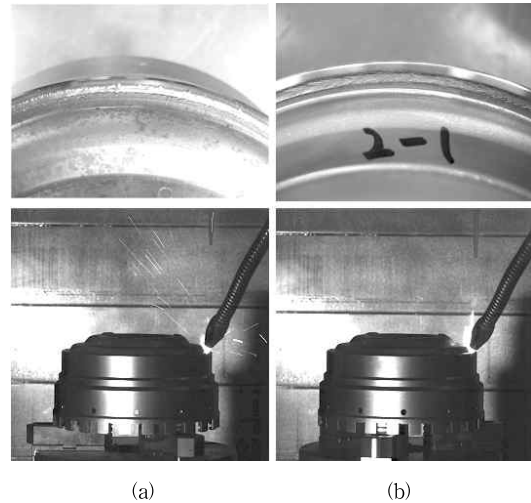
Spatter generation during laser welding of annulus gear ; (a) Laser power: 3kW, Focal position: 0mm, (b) Laser power: 2.5kW, Focal position: -13mm
